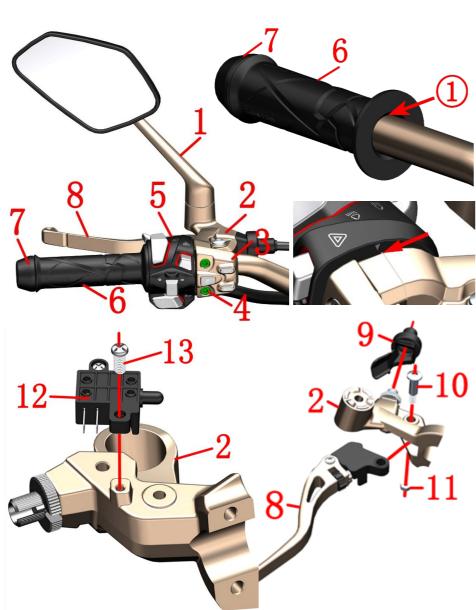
F	FRONT FORK	Left hand component	CHK	40)
